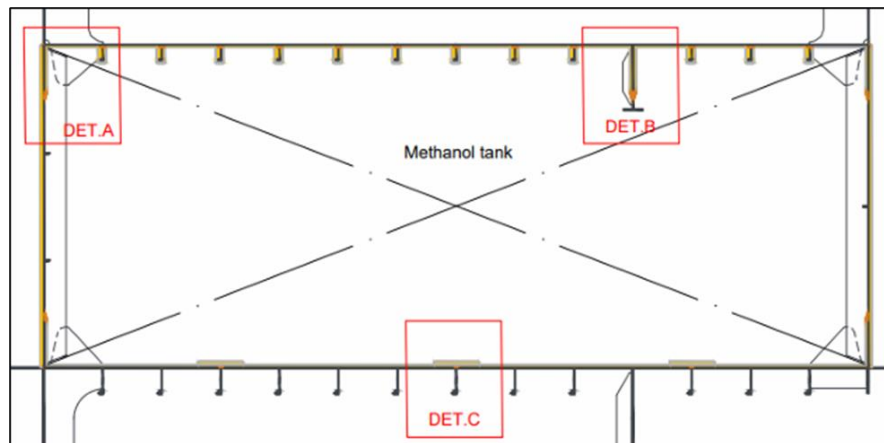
Methanol Tank Arrangement with Structural Details (DET.A, DET.B, DET.C).
